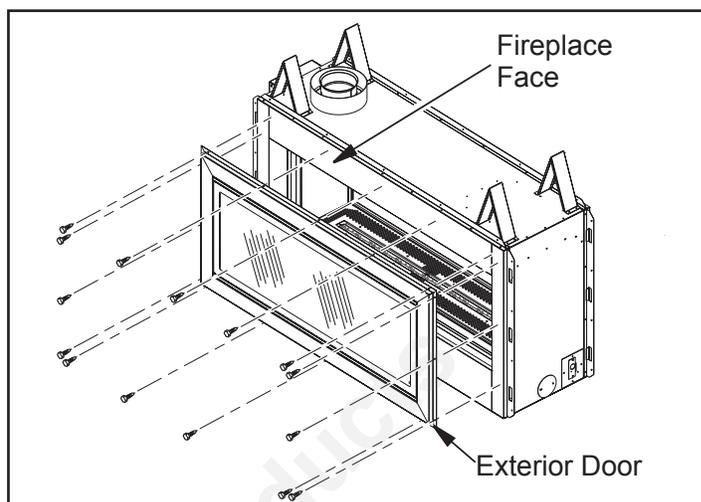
Installing Exterior Door for See-Thru In/Out Application
